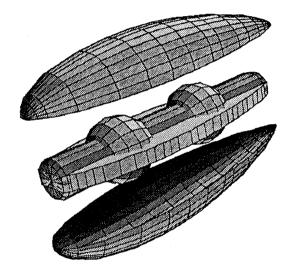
Exploded View of the Odyssey II Mechanical Structure
